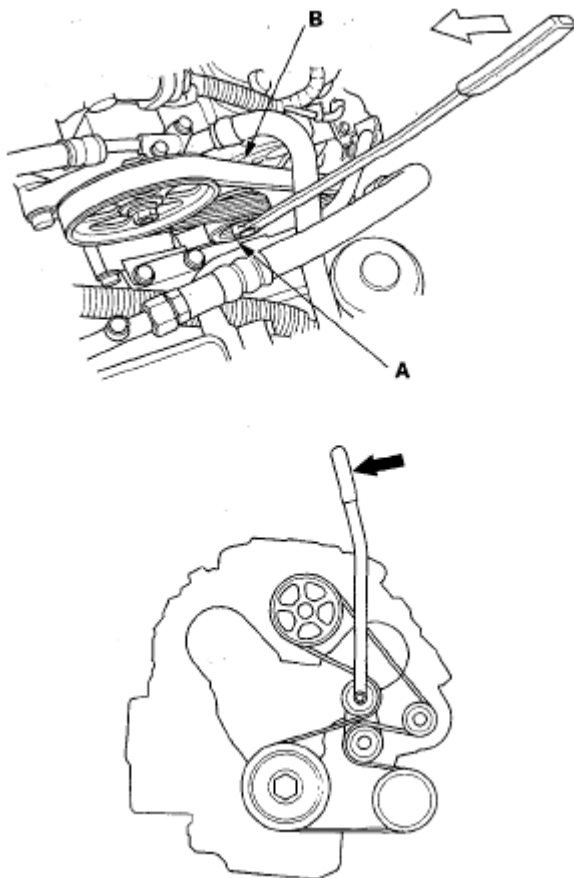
Identifying Auto-Tensioner With Belt Tension Release Tool
